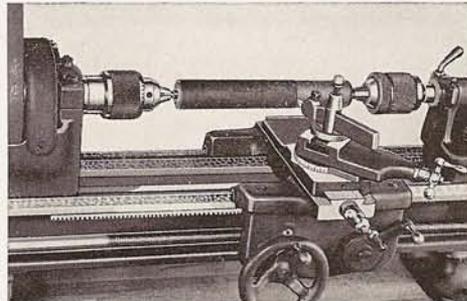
Truing a Typewriter Platen. Lathe Trues all types of rollers.
